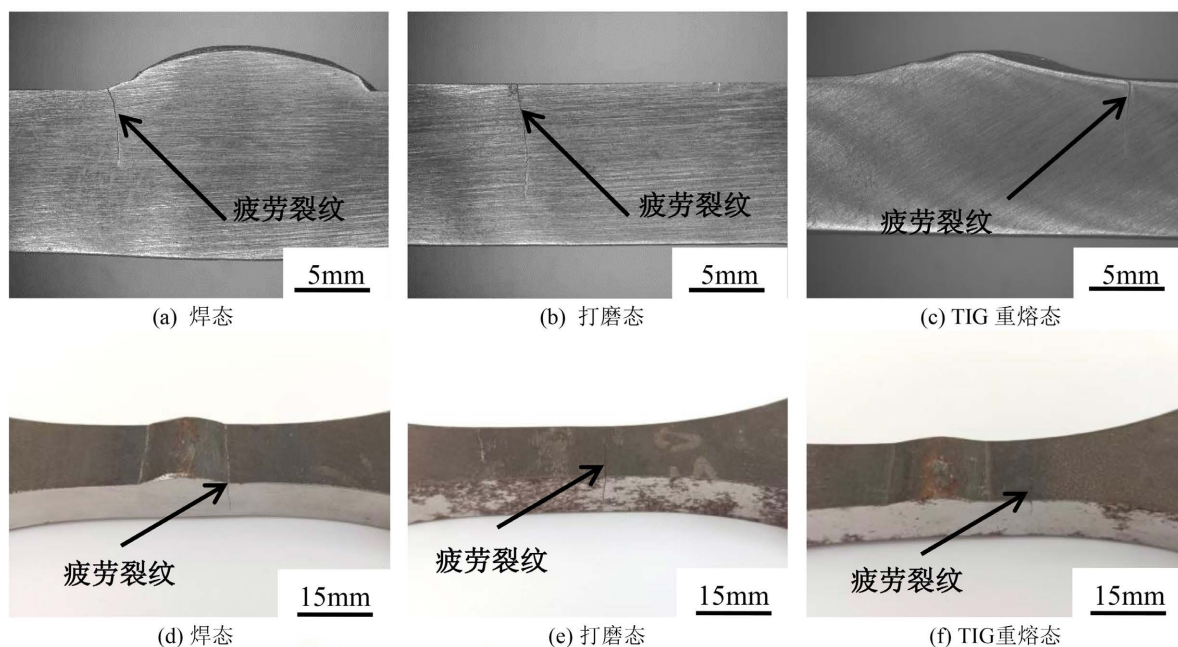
The fracture locations of the fatigue specimens of the welding joints
